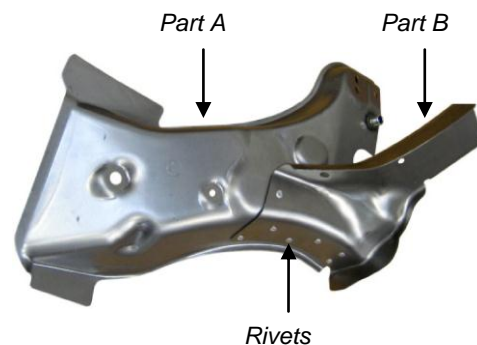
Two sheet metal parts A and B assembled with 7 rivets
